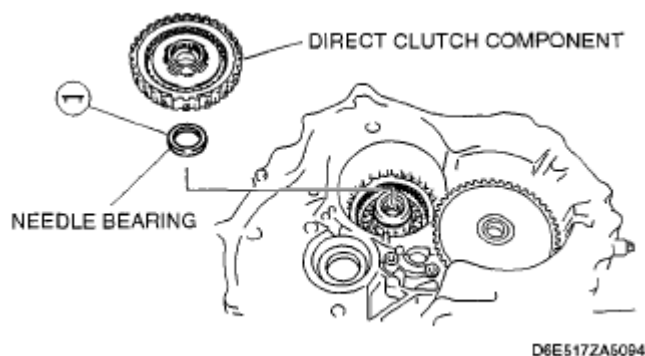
View Of Direct Clutch Component, Needle Bearing And Transaxle Case
